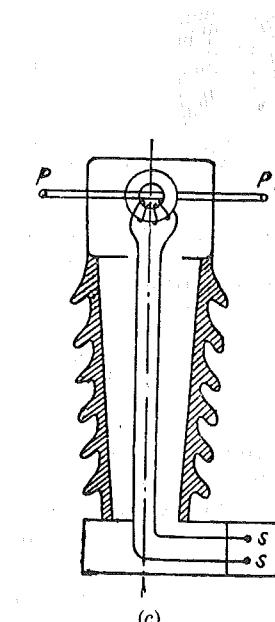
Typical arrangement in out-door HV CT. (Secondary is wound on bushing type core. Primary is mounted in insulator bushing insulation around primary not shown.)
